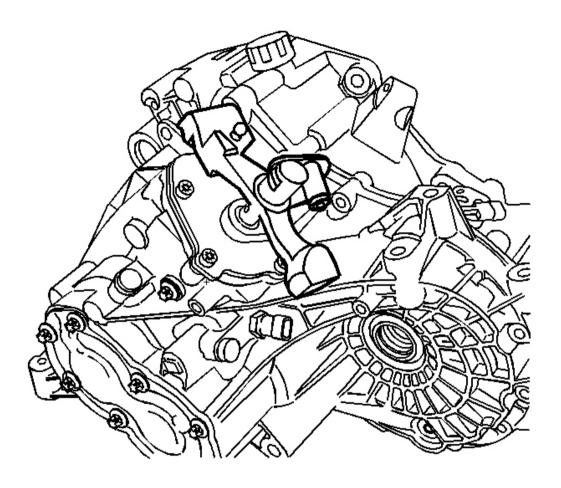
Transmission Courtesy of GENERAL MOTORS CORP.
